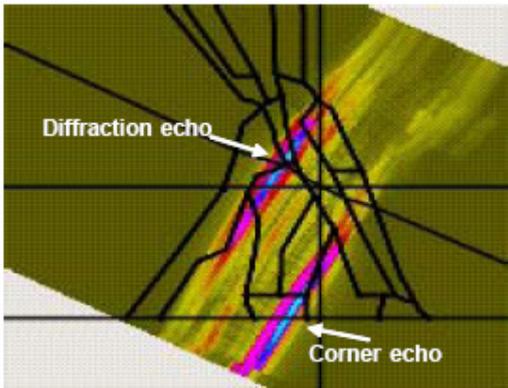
Bscan for a notch (15 mm height) located in the weld
